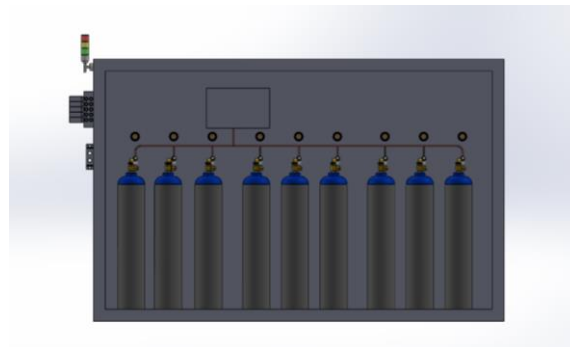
Full Assembly of DLA Cabinet Gas Tank Exchange Mechanism
